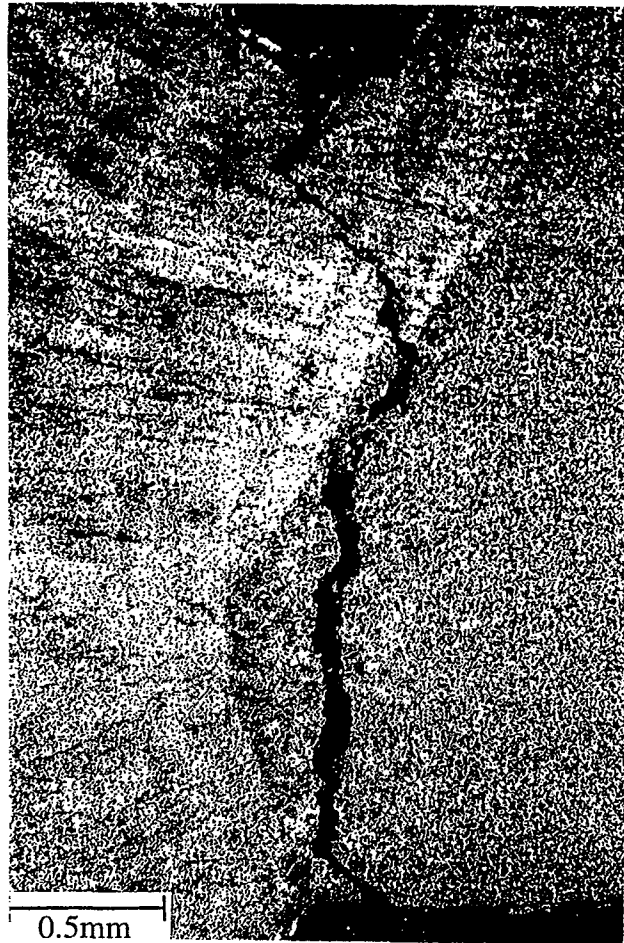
Crack growth through HAZ. Weld metal deposited using electrode
